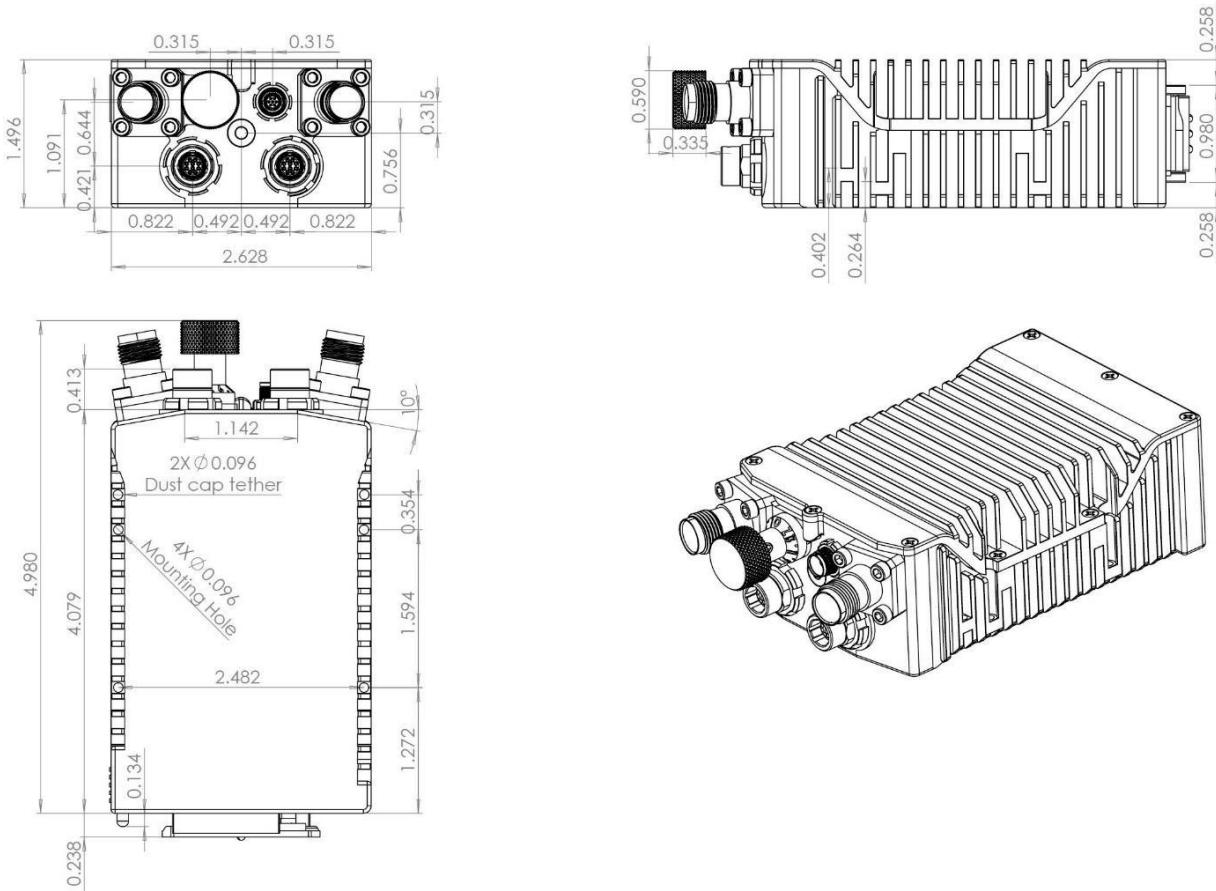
SC4200EP Mechanical Drawing (top) and Mounting Pattern (bottom)
